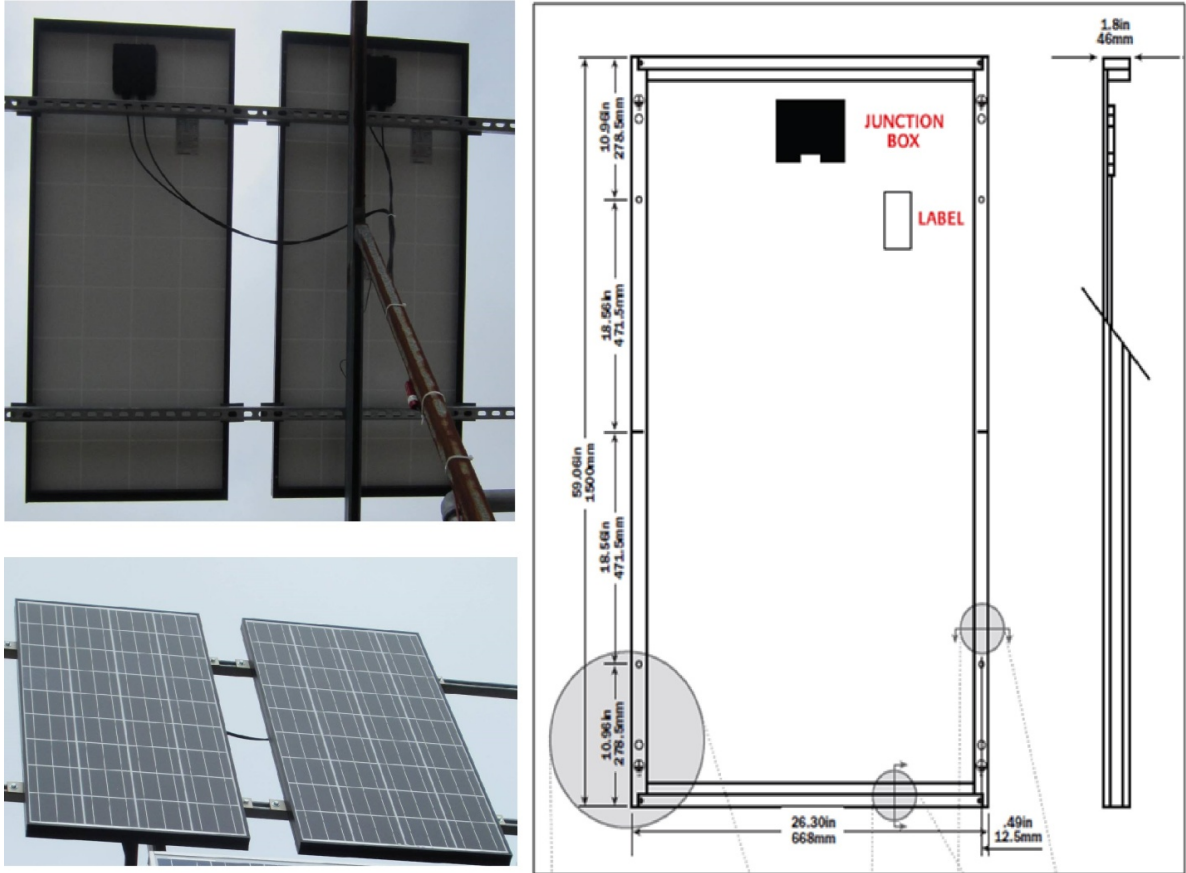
Front and rear view of installed PV panel & PV panel diagram
